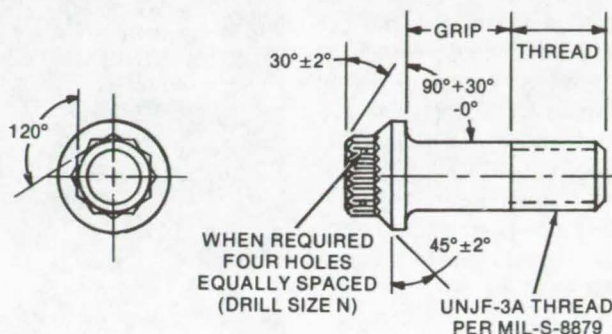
Conventional Design of large-diameter fastener of CRES alloy can be used to fabricate bolts up to 3/4-in. diameter.
